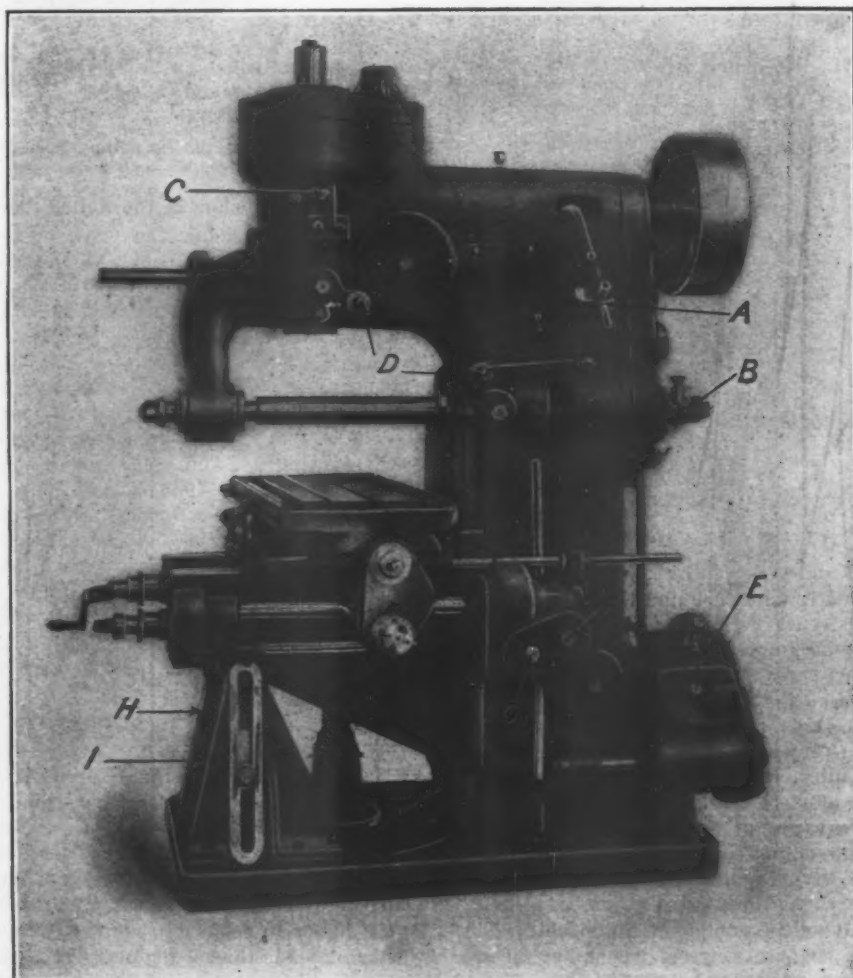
The New Knee Type Combined Horizontal and Vertical Spindle Milling Machine Built by the Ingersoll Milling Machine Company, Rockford, Ill.
